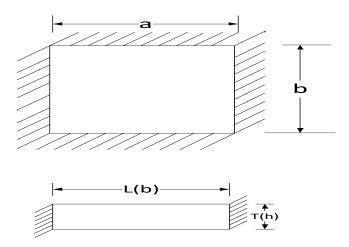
Schematic views (a) plan and (b) elevation of the of the mould base plate
